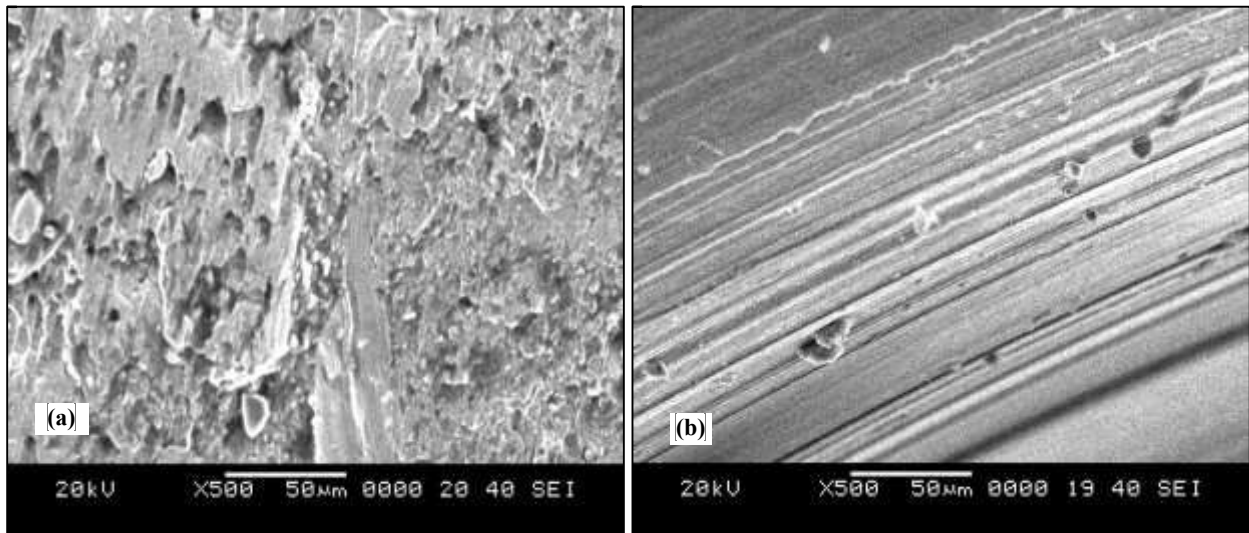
Fracture Surface Morphology (a) N=1200 rpm, V=20 mm/min, DT=2 seconds, (b) N=900 rpm, V=20, DT=2 seconds
